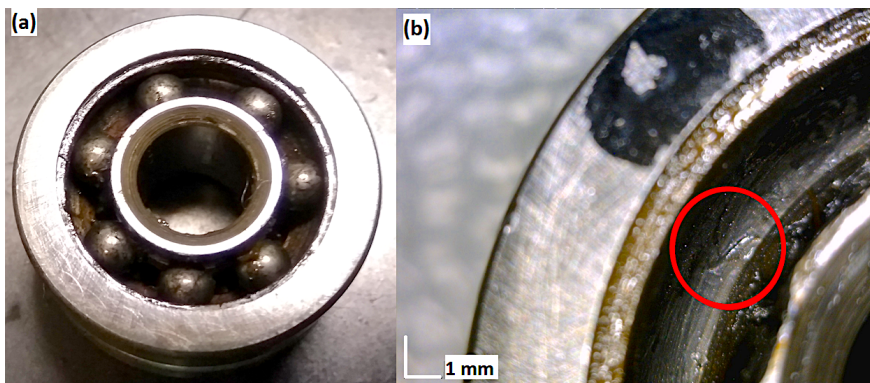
Bearing with the artificial damage on the outer ring a) bearing B b) zoom on the outer ring fault of bearing B.
